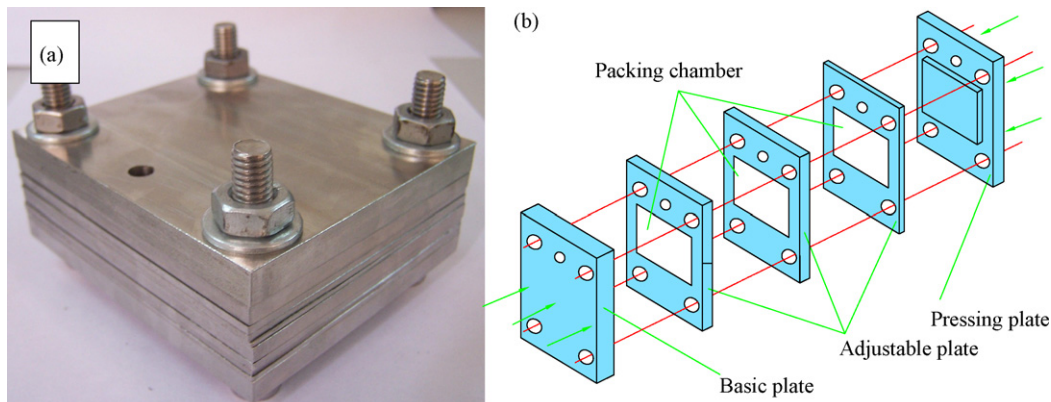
(a) Appearance and (b) assembling principle of the mold pressing equipment for the PMFSS.
